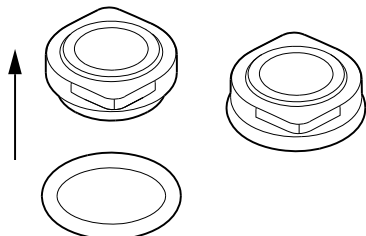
Fitting the O-ring on the stationary shaft seal part
